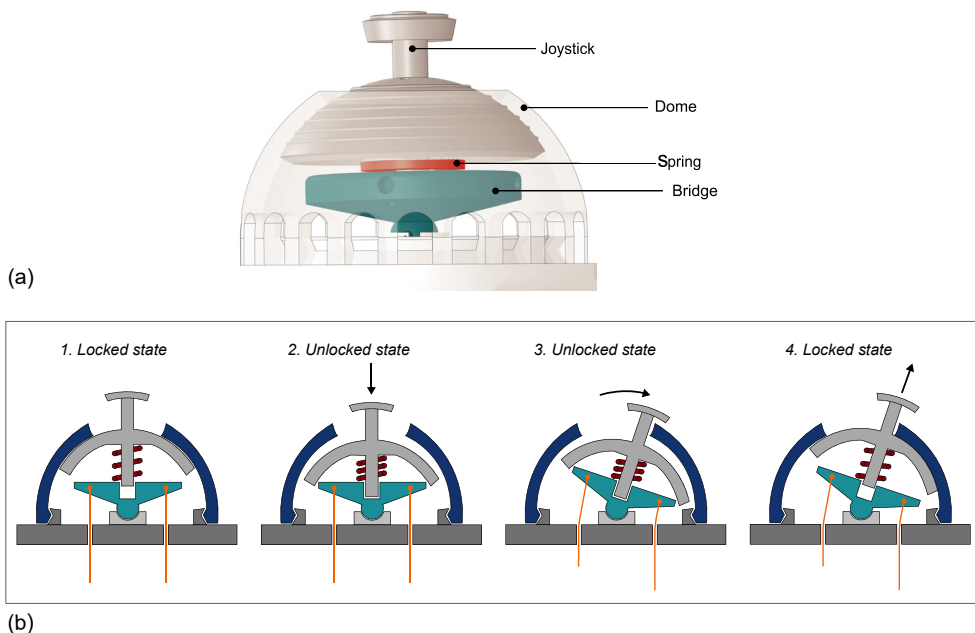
Working principle of the steering mechanism. (a) Three-dimensional (3D) render of the assembled joystick, showing the joystick, the dome (transparent to show the underlying components), bridge (blue), and spring (red). (b) Schematic drawing of the working principle of the friction lock showing the bridge (blue), spring (red), and cables (orange). (1)–(4) show the actions taken to move and lock the steerable segment.
